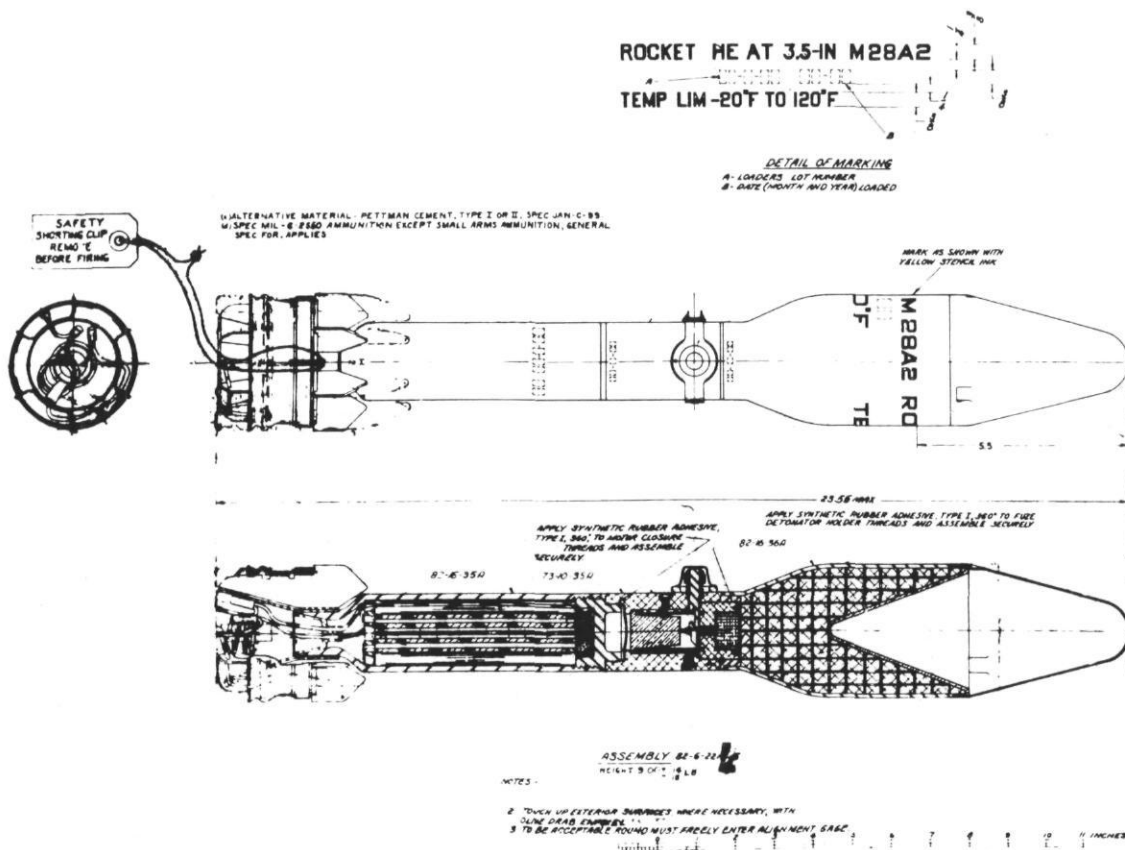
Rocket, HEAT, 3.5", M28A2, Assembly.
